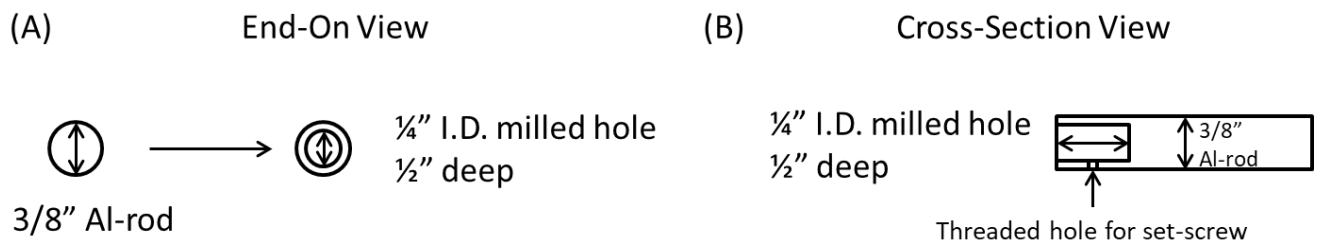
Aluminum rod milling schematics showing (A) end-on view for motor drive shaft and (B) cross-section for situating the setscrew to hold the rod to the drive shaft of the motor. All dimensions are in inches where 1 inch is equivalent to 2.54 cm.
